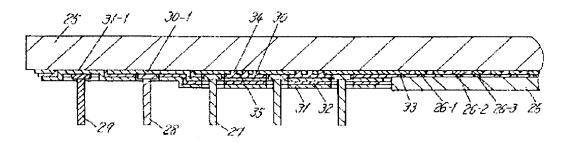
The perspective view of the conventional pin grid array form ceramic package for high-speed microprocessors
